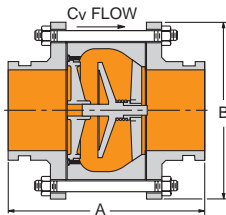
G - GROOVED-END SILENT CHECK VALVE
